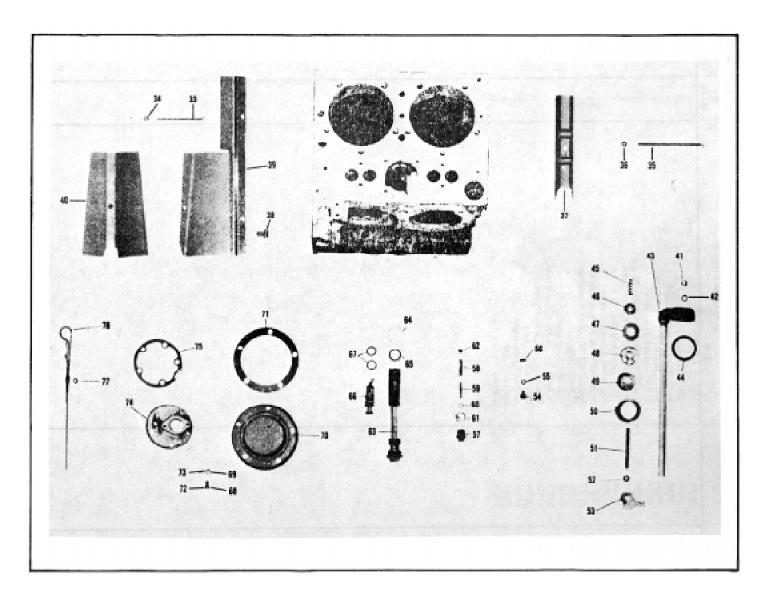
Crankcase Assembly (Sheet 6 of 10) 8-65
